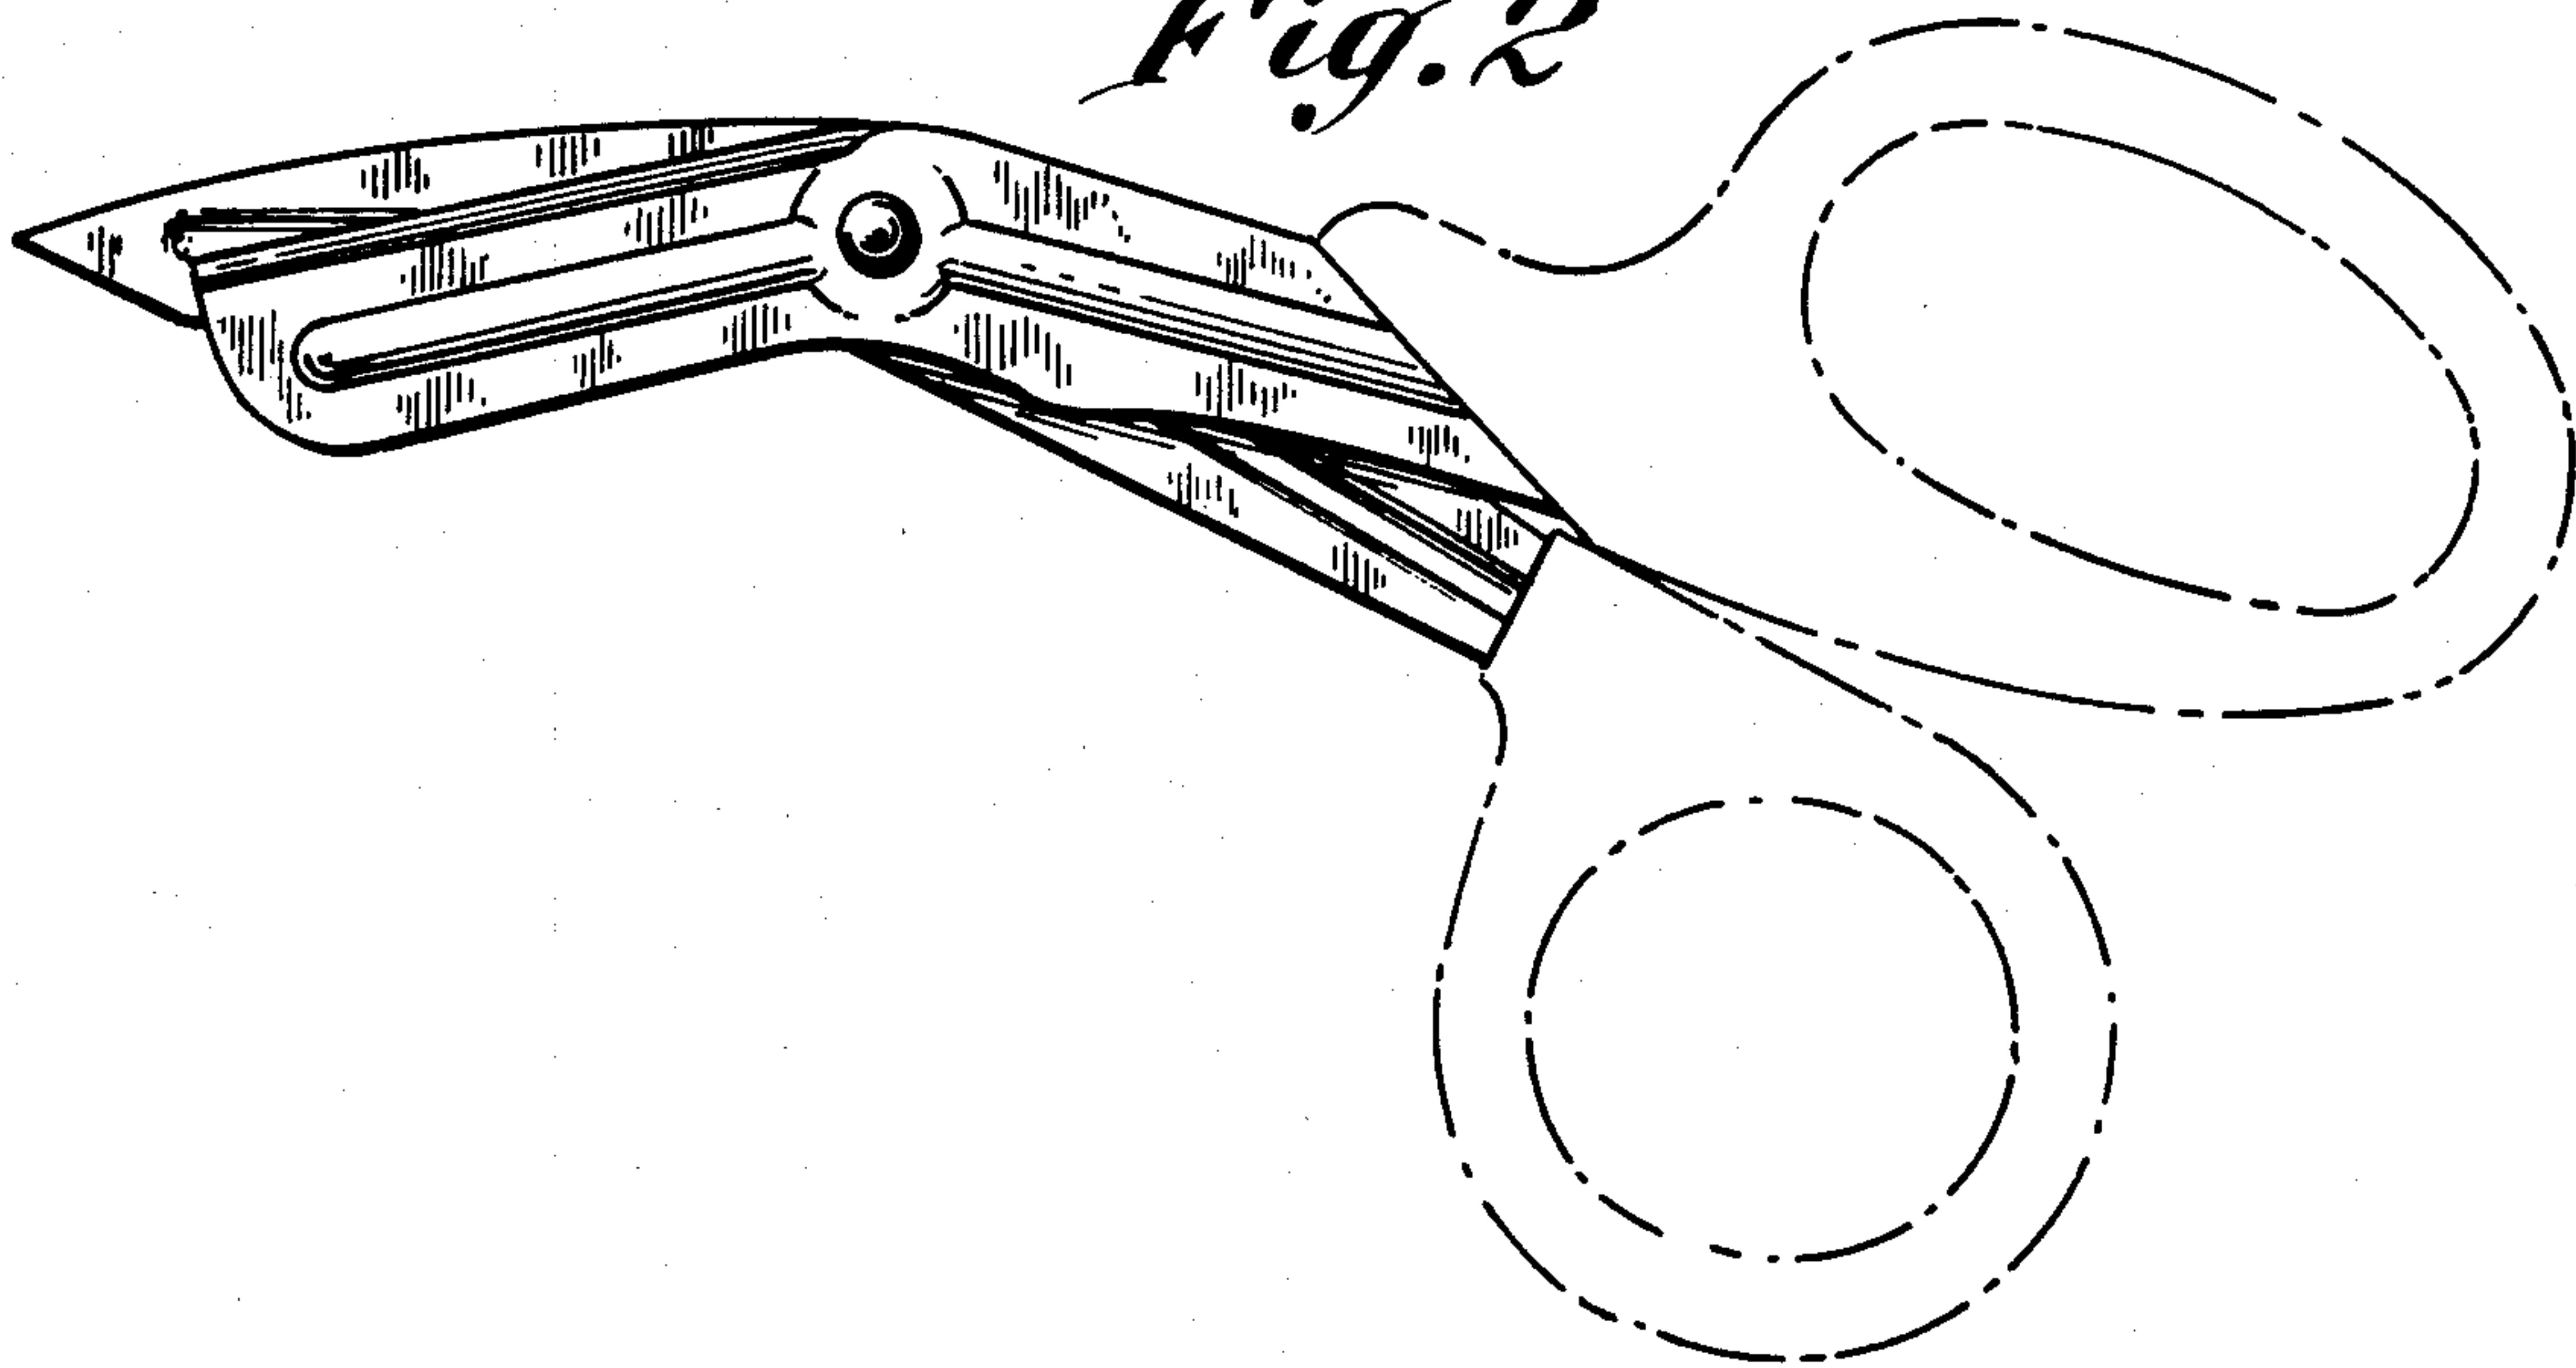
is a side elevation of a blade assembly for cutting shears showing my new design; FIG. 2 is a view as seen from the side opposite FIG. 1; FIG. 3 is a top plan view of FIG. 1; and FIG. 4 is a top plan view of FIG. 2. The broken line representing the handle is shown for illustrative purposes only.
